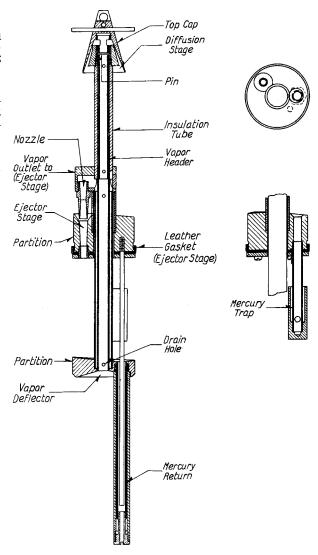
Sectional View of Pump Mechanism for Two-Stage Mercury Vapor Vacuum Pump
